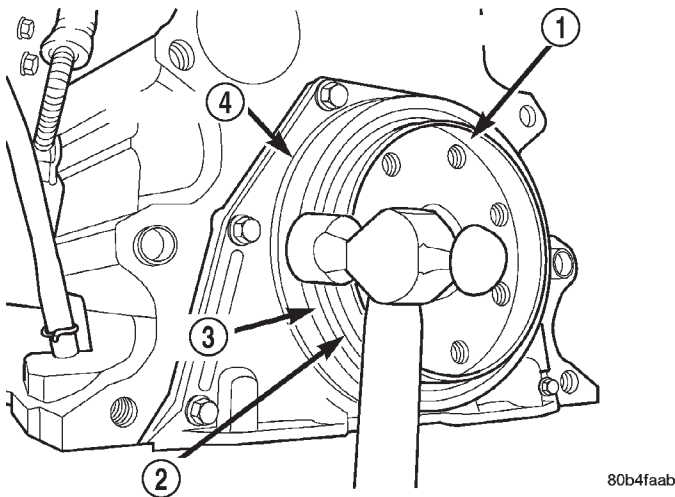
Installing Seal Using Alignment Tool and Hammer
